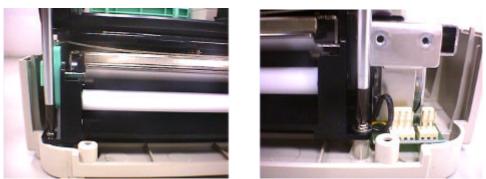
Remove the screws in the lower left, lower right corners of the main mechanism.
